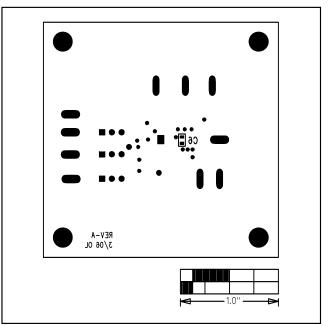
MAX8614 EV Kit Component Placement Guide— Solder Side
